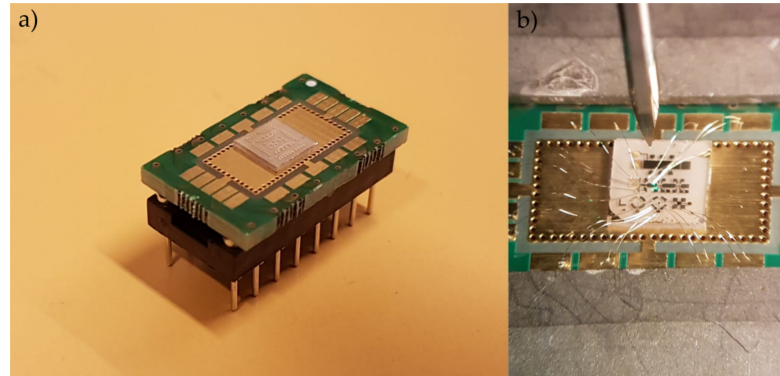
a) SRO₃₂ mounted on a PCB. b) SRO₂₆ at the wire-bonder (needle apparent in center)
